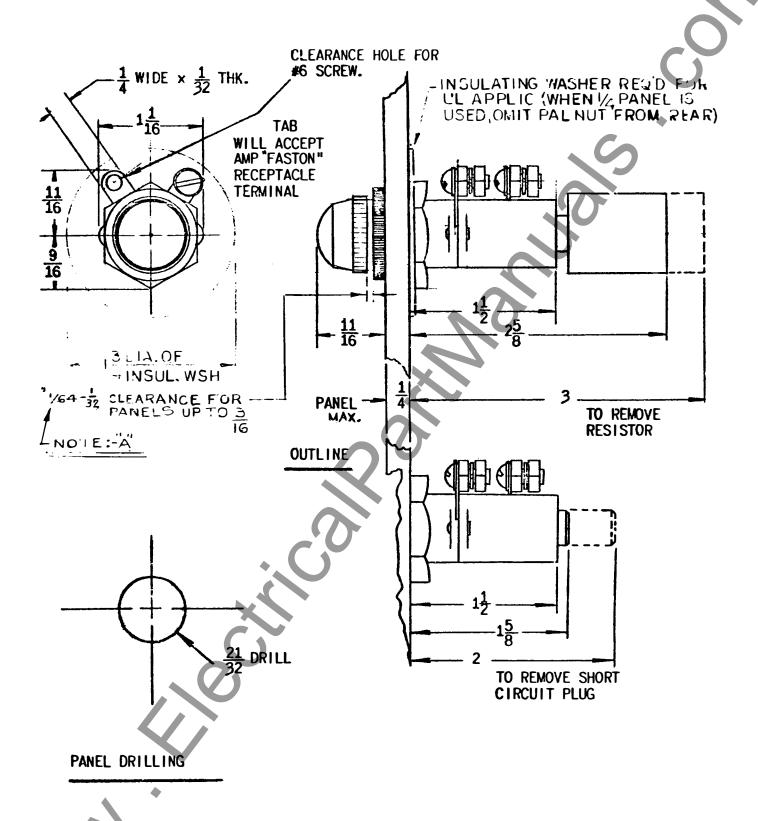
(0165A7859-6) Outline And Panel Drilling For Type ET-16 Indicating Lamp
